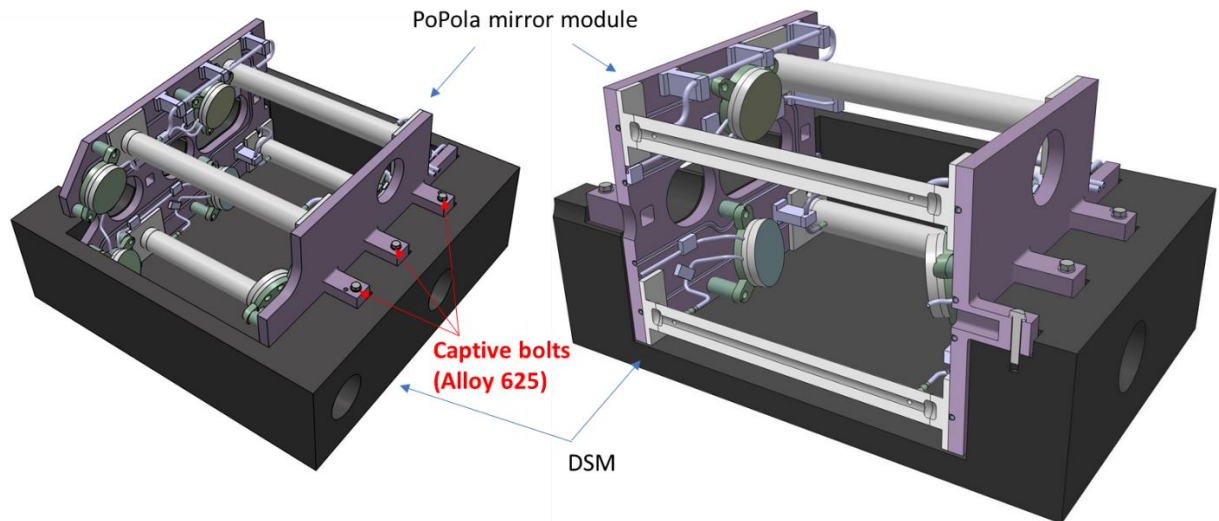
Bolt fixation to connect UEMM and LEMM to DSM.
